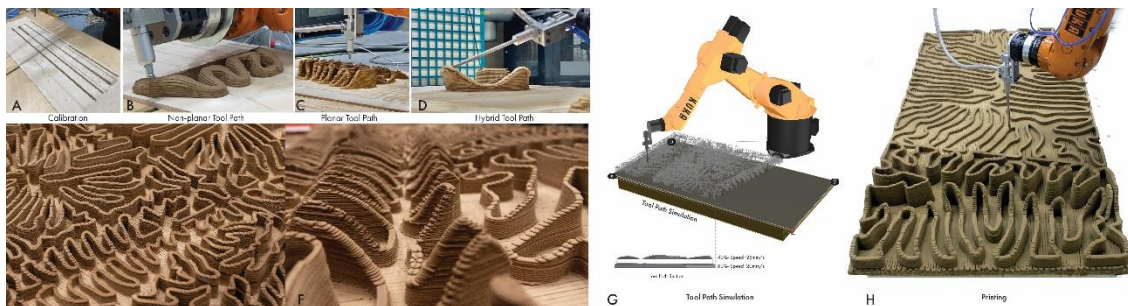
Left: A. Speed calibration; B. Non-planar extrusion; C. Planar extrusion; D. Hybrid tool path extrusion; E. zoomed view of panel; F. Detail view of panel; G. Tool path simulation; H. Physical printing.
